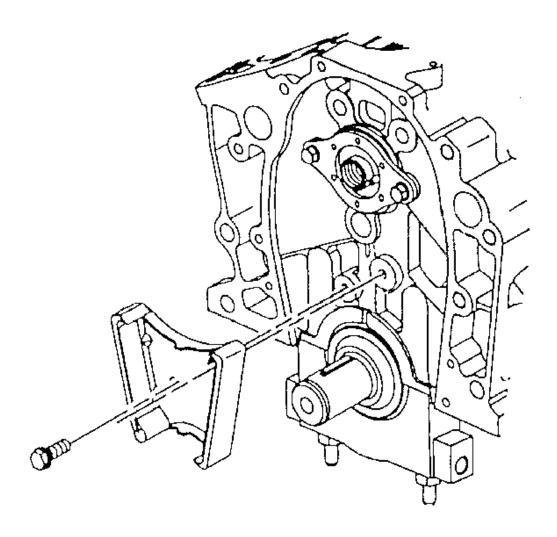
View Of Timing Chain Dampener & Bolts Courtesy of GENERAL MOTORS CORP.
